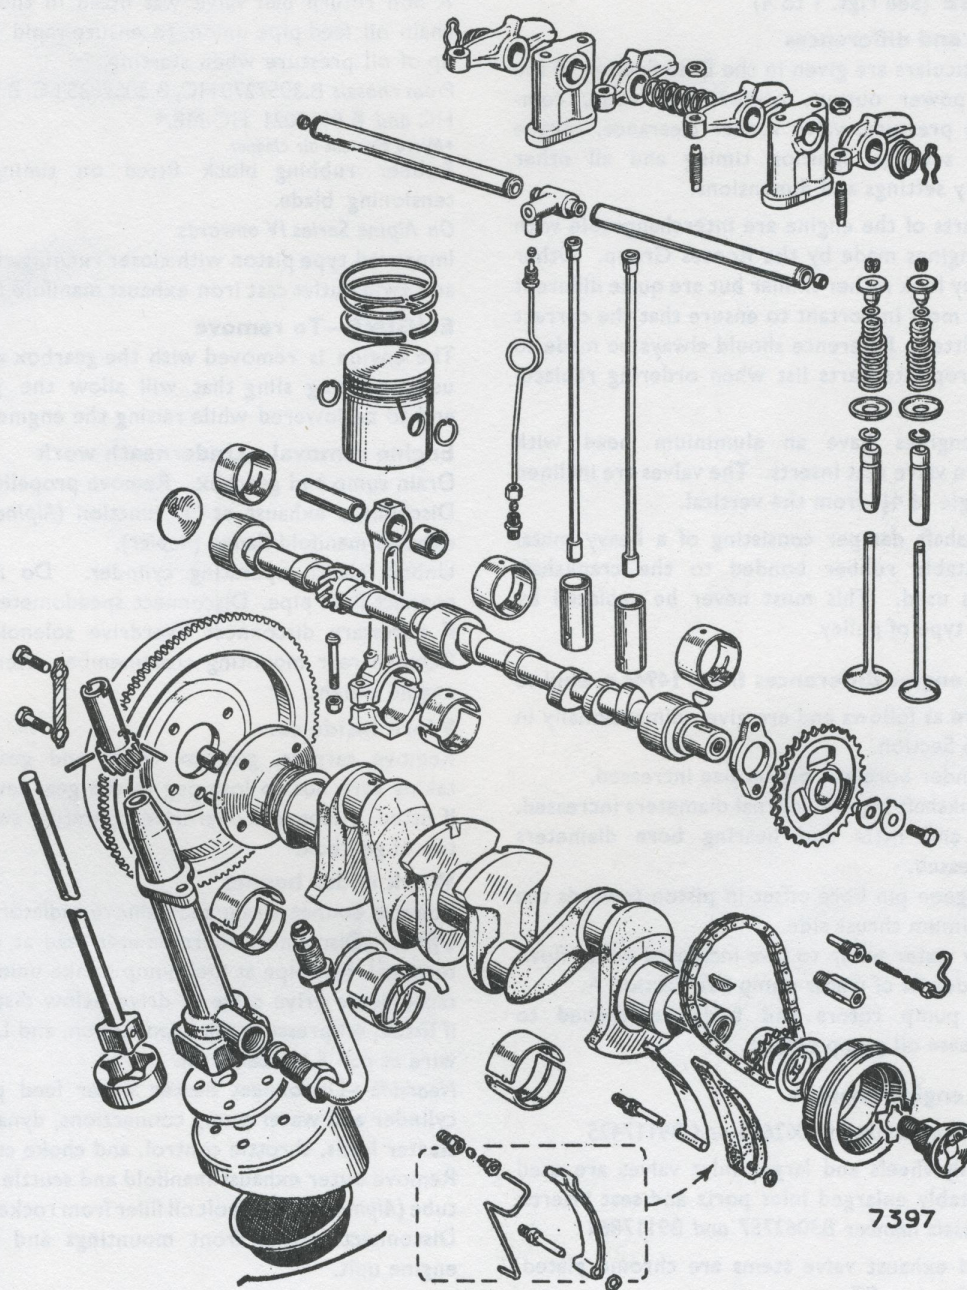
Exploded view of working parts (1494 c.c. engine shown)
